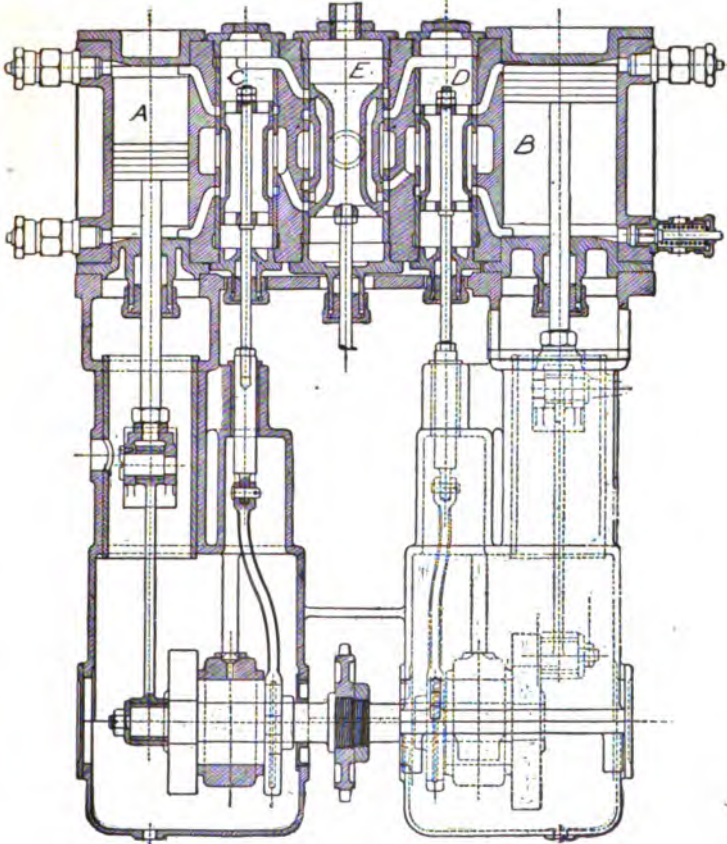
Section of the Stearns Compound Steam Carriage Engine. A is the high-pressure cylinder; B, the low-pressure cylinder; C and D, the steam valves operated by single eccentrics; E, the central control valve and chamber.
